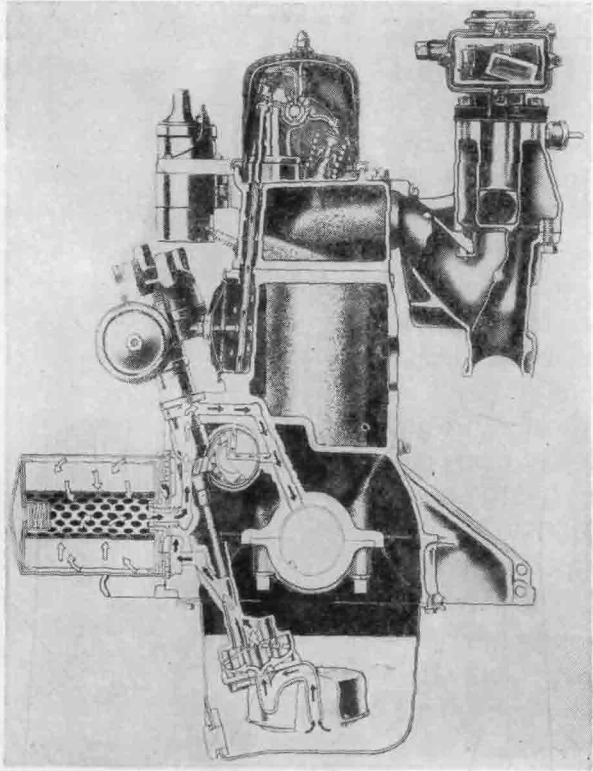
Lubrication system of a six-cylinder overhead-valve engine. Arrows show oil flow to the moving parts in the engine. (*Ford Division of Ford Motor Company*)
